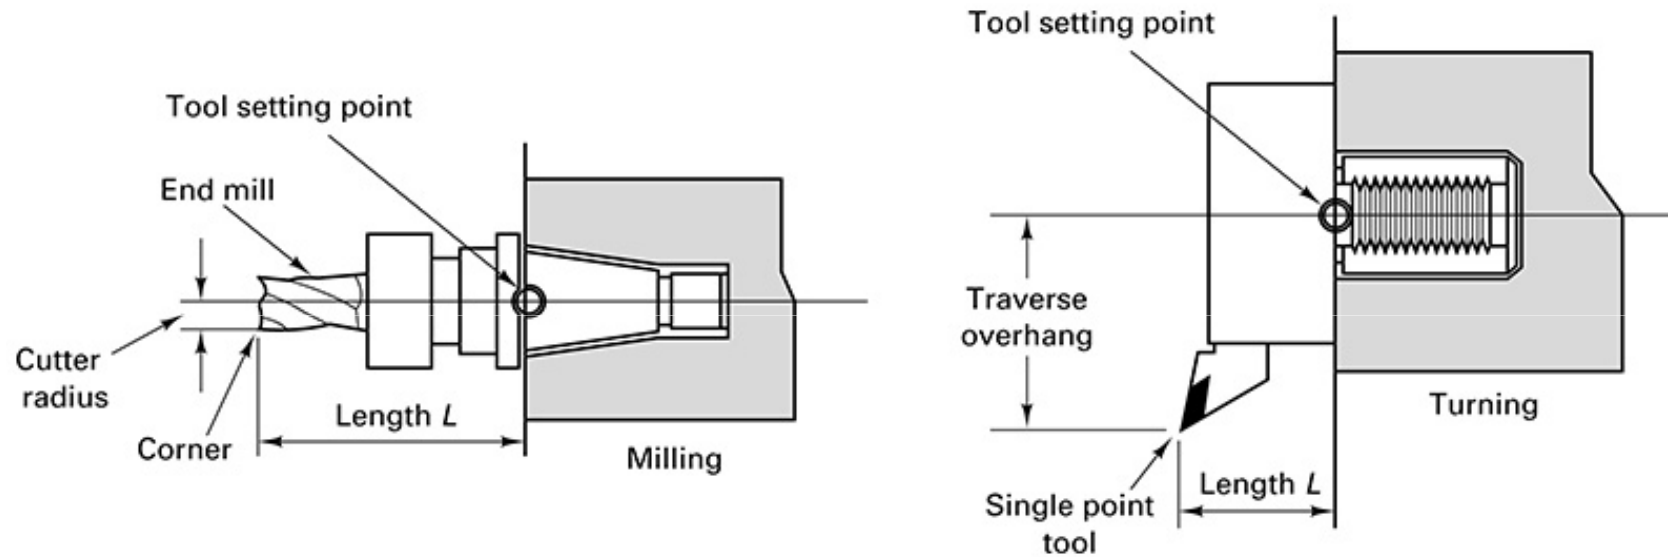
The location of the corner of the end mill (left) or the tip of a single-point tool (right) must be known with respect to the tool setting points so that tool dimensions are accurately set.
